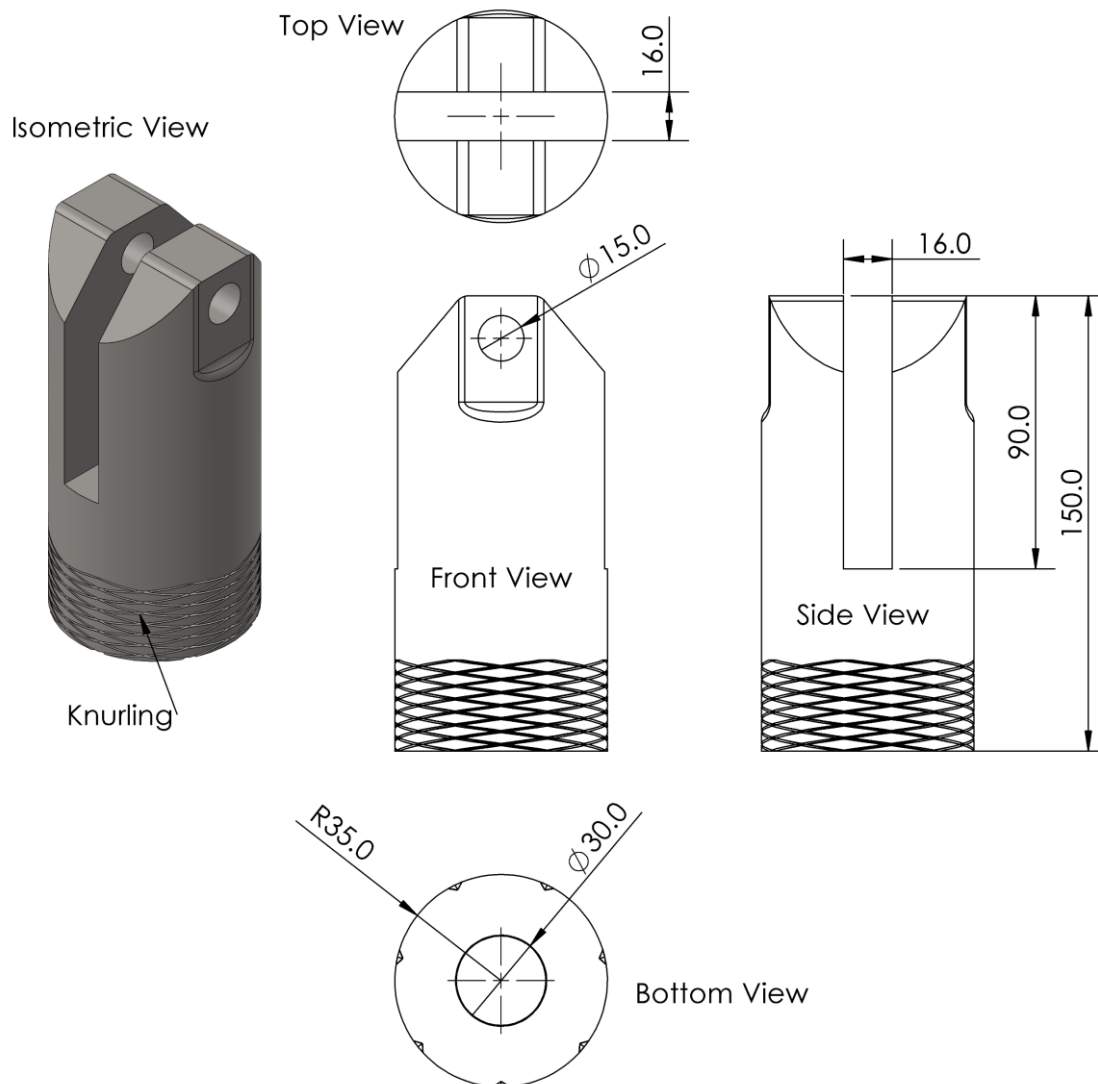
Dimensions of the deep groove Clevis grip for the SECC specimen.
